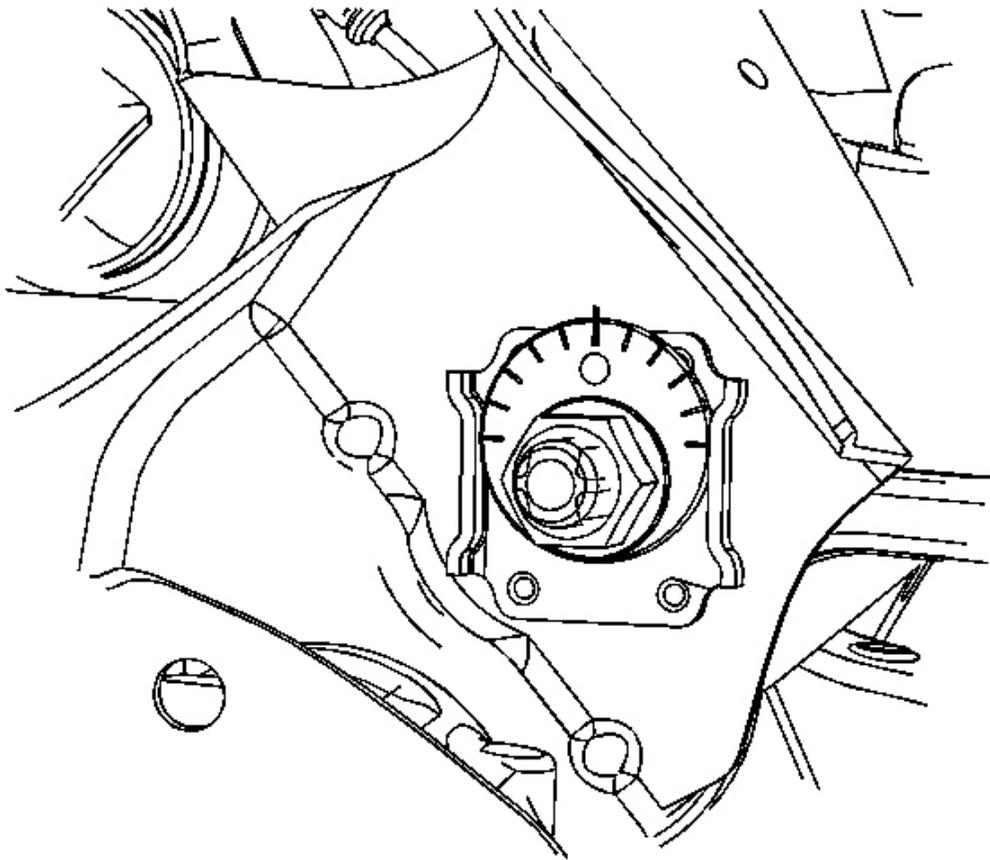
Identifying Retaining Nut From Adjuster Link To Knuckle
